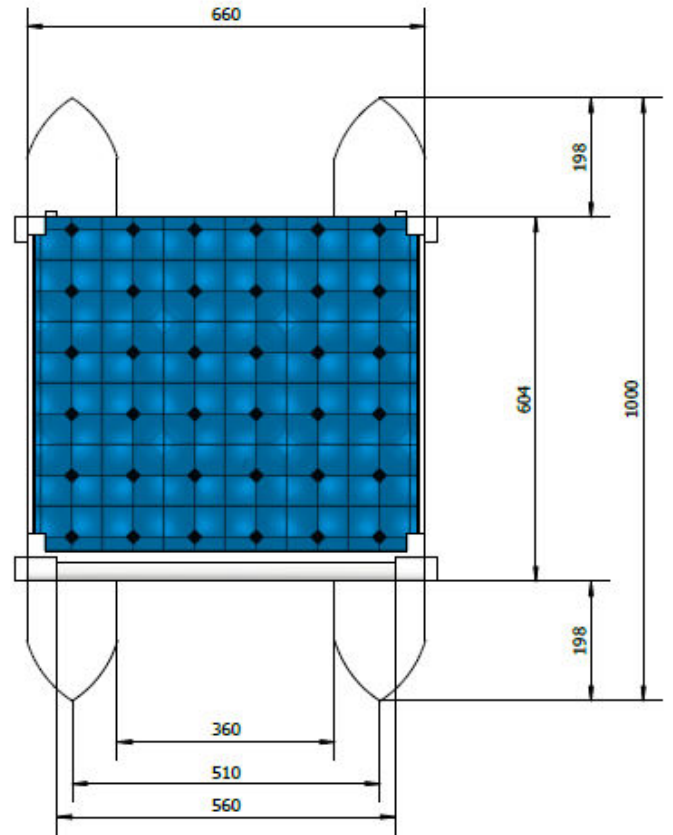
Plan view of the catamaran floating structure; dimensions in mm
